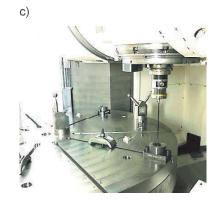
Mazak Integrex e-1600V 5-axis multi-task machining center:
